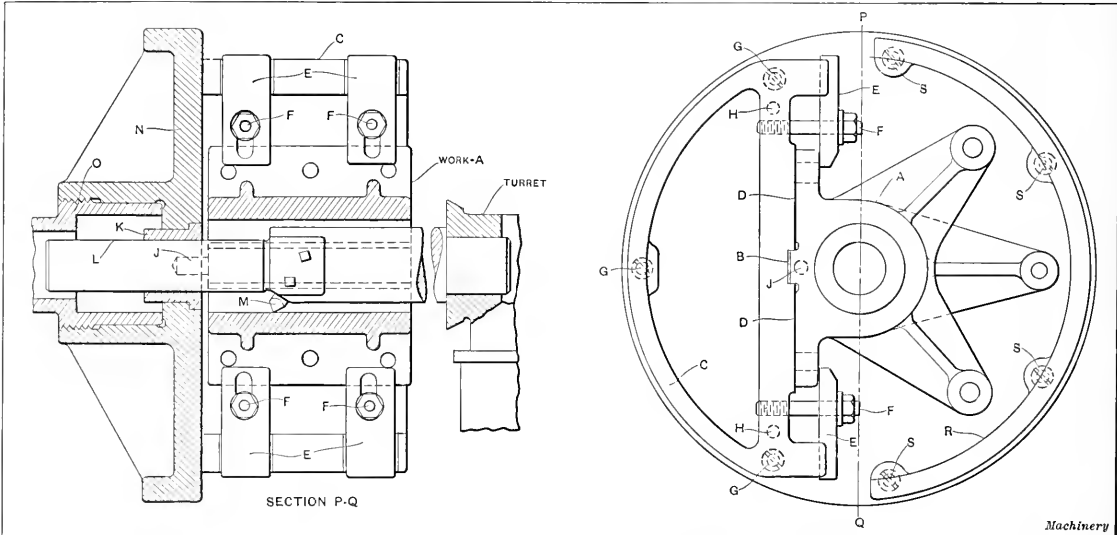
Fixture for boring Irregular Castings on Horizontal Turret Lathe
